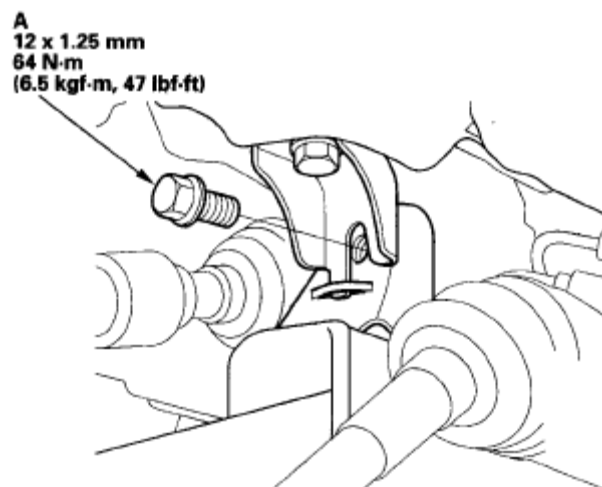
Identifying Front Subframe Middle Mount Bolt On Left Side - Specified Torque
